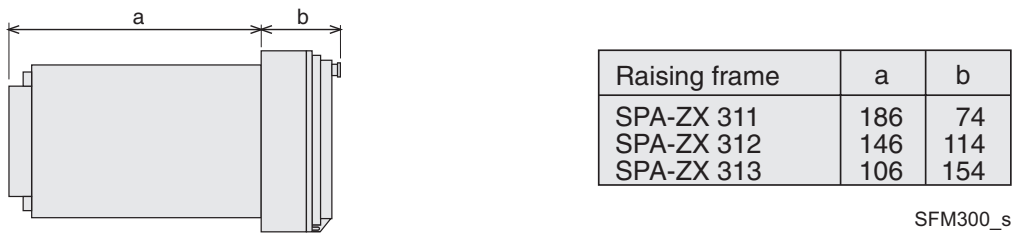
Semi-flush mounting relay case (dimensions in mm)
